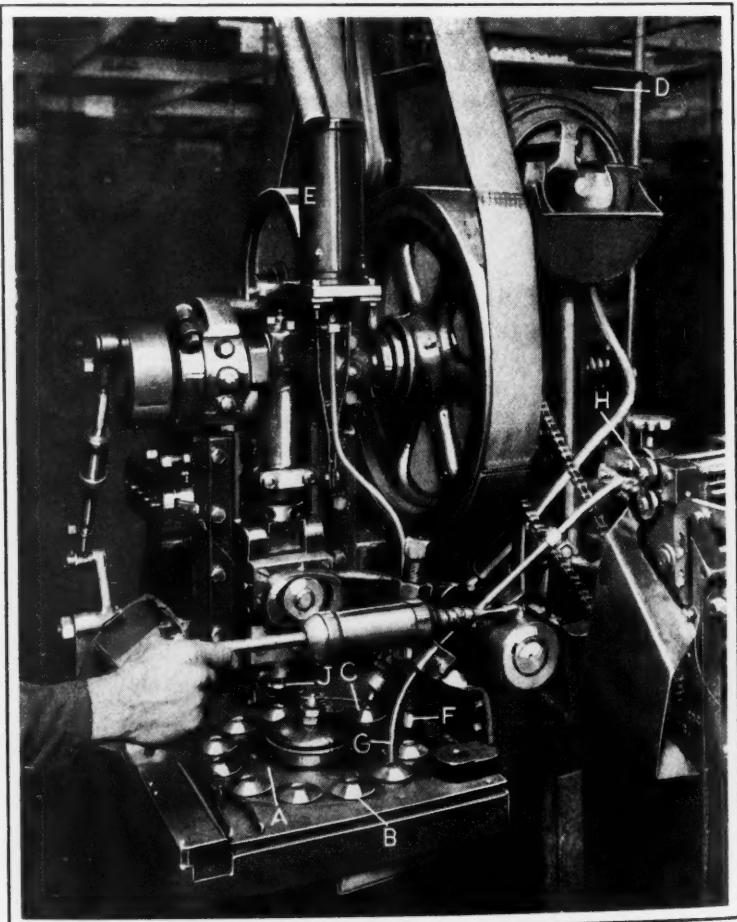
Punch Press Provided with Special Equipment for Assembling and Staking 4440 Small Fittings per Hour
